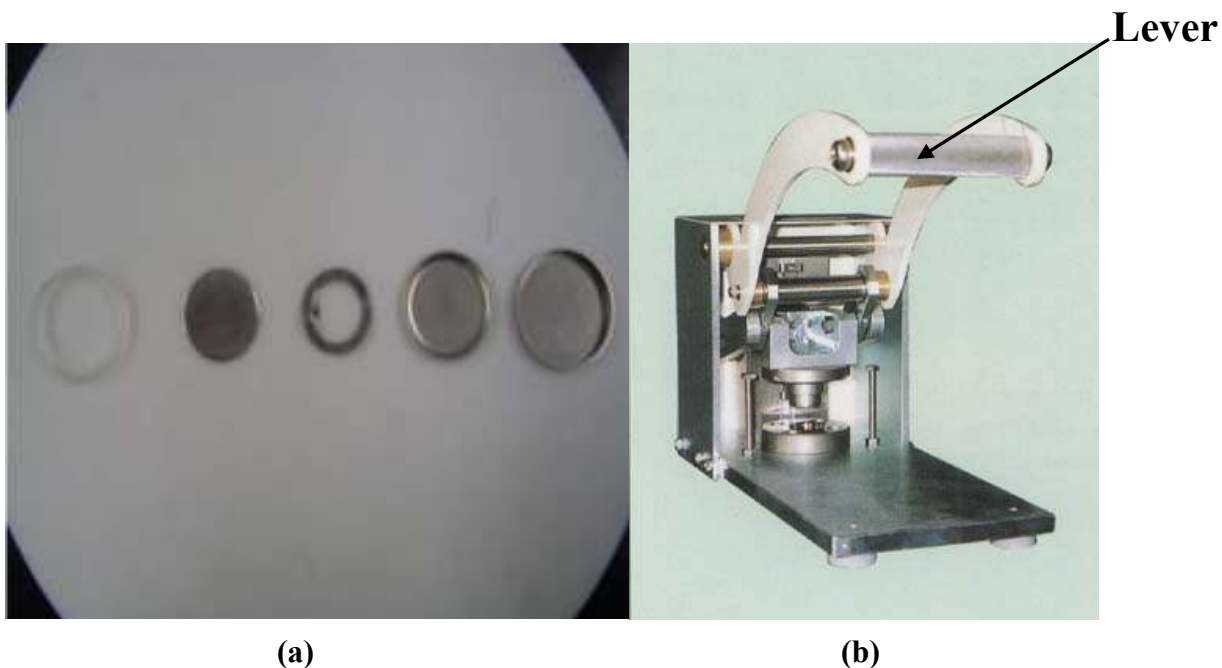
(a). Parts of Coin cell (From left: Rubber gasket, stainless steel plate, stainless steel spring, cap, coin case) (b) Hand-Operated Closing Tool.
